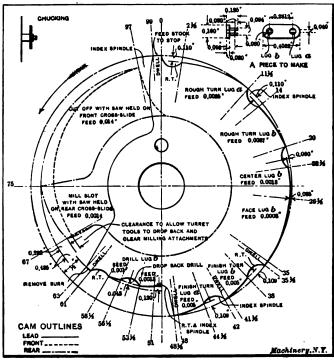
Lay-out of a Set of Cams for Making a Piece requiring the Indexing of the Work-spindle
